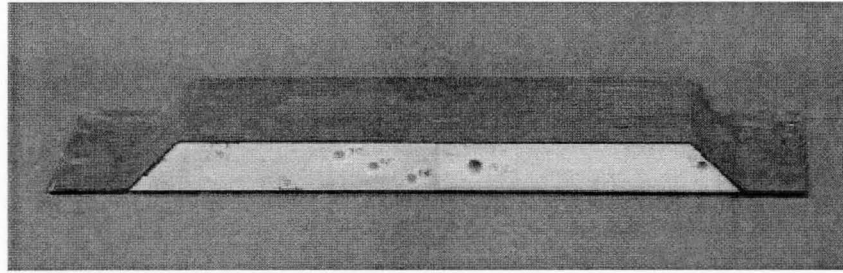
CFRP sandwich specimen with inserted defects (Hillger et al. 2004)
